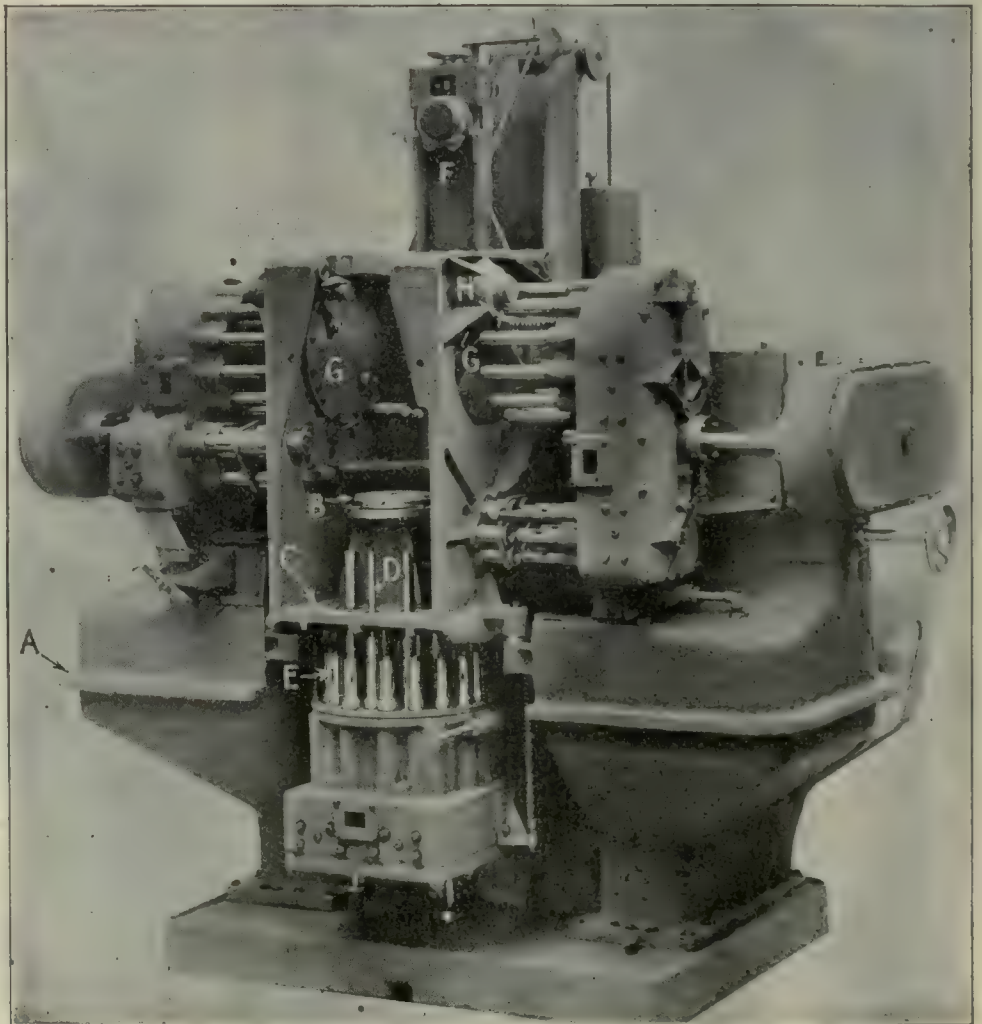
THREE-WAY DRILLING MACHINE FOR TRACTOR AXLE HOUSING
